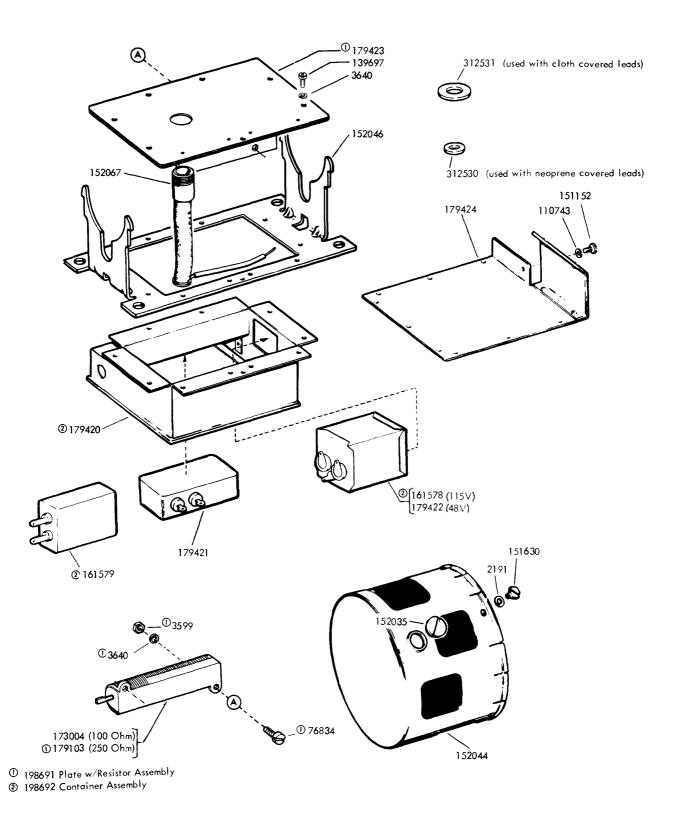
SERIES MOTOR MOUNTING PARTS
